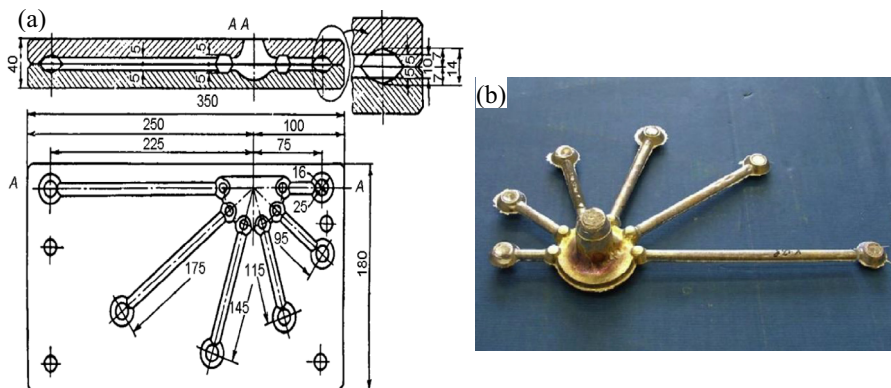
(a) Schematic mould of PSM [9] and (b) a typical casting [49].
